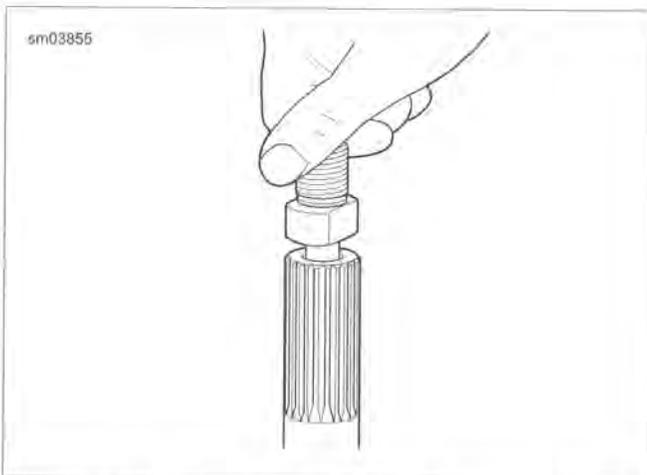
Thread Pilot Adapter into Sprocket Shaft
